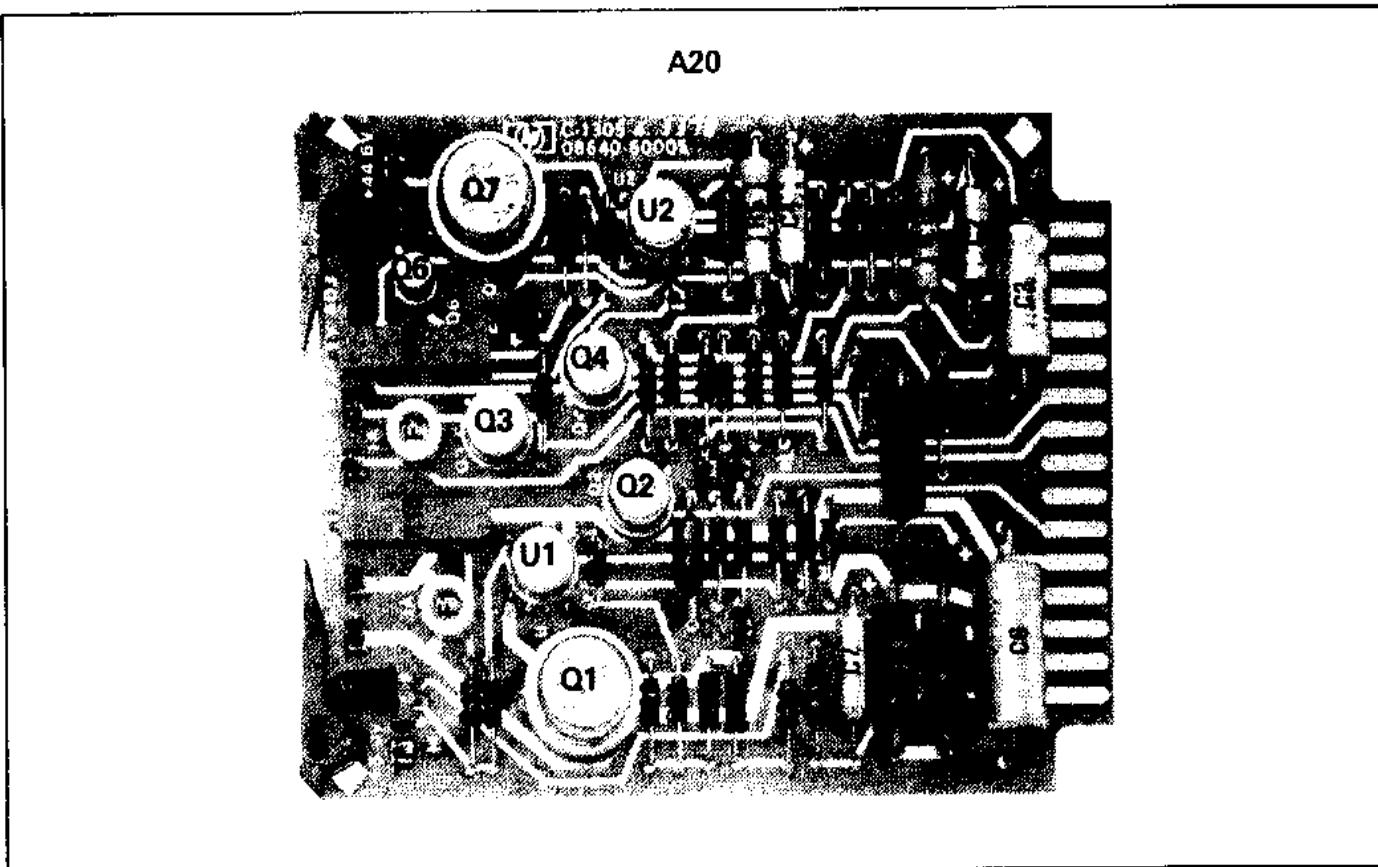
A20 +5.2V and +44.6V Regulator Assembly Component Locations
